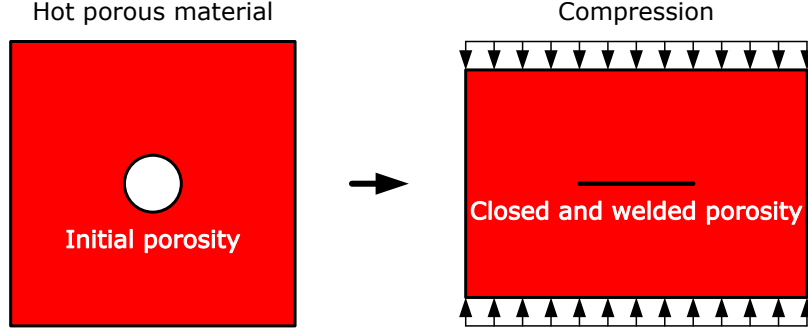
Welding of porosity in hot metal forming.
